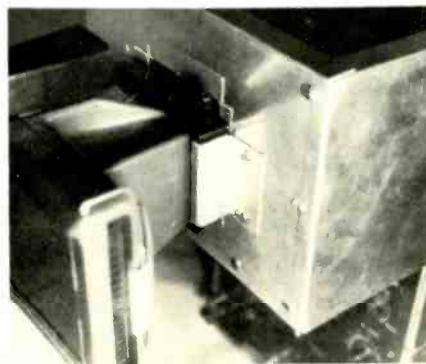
OTHER SIDE shows clamp bracket holding camera to front panel of scope.
